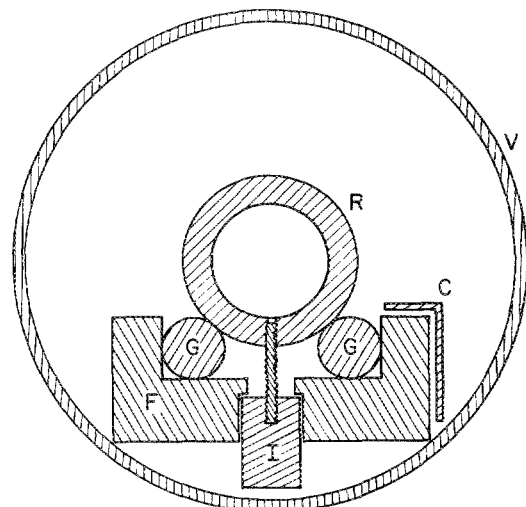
Mechanical drawing of the parabolic potential buncher. *V*: 4-in. outside diameter vacuum chamber; *R*: 304 stainless-steel accelerator ring, 1.00-in. inside diameter, 1.375-in. outside diameter; *C*: mica dielectric capacitor plate; *G*: 0.500-in. diam quartz insulator rods; *F*: 304 stainless-steel frame; *I*: ceramic insulator holding ring in place. There are 100 rings *R*, but they start at number 11 because we are not bothering to shape carefully the first part of the parabola.
